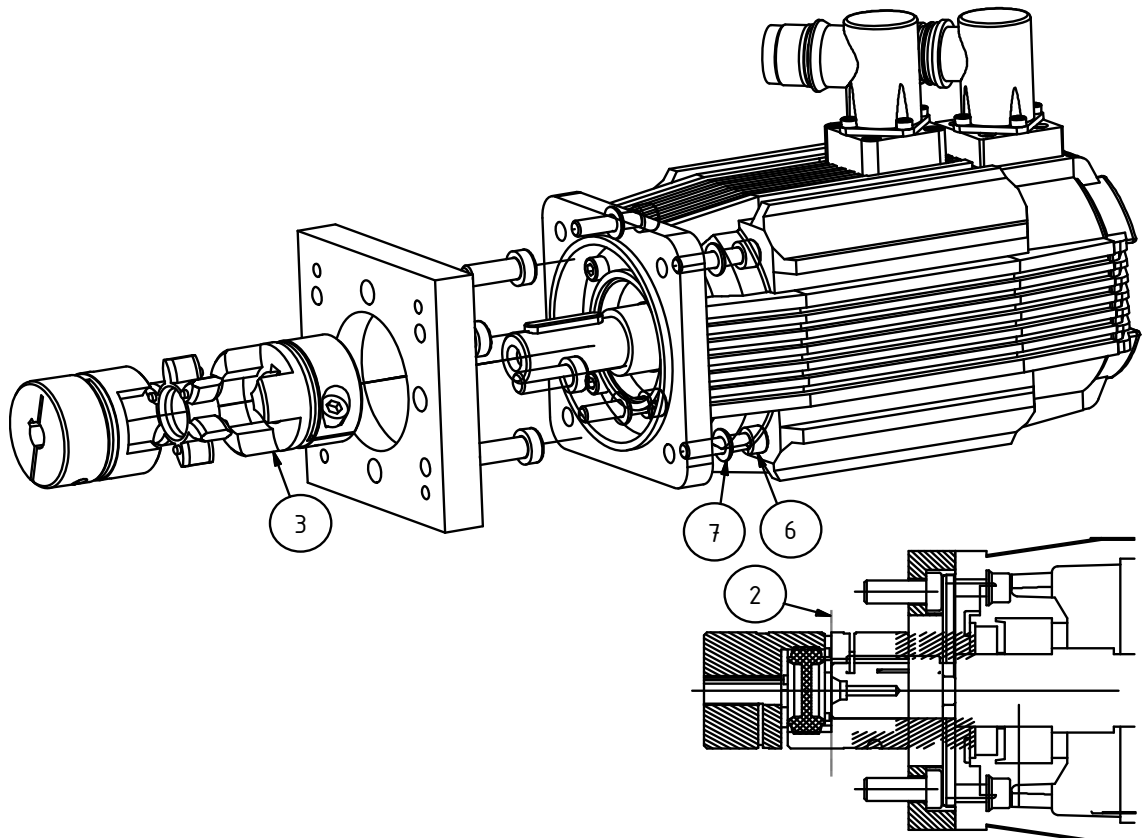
Motor /gear assembly ETH032 ... ETH080 inline
